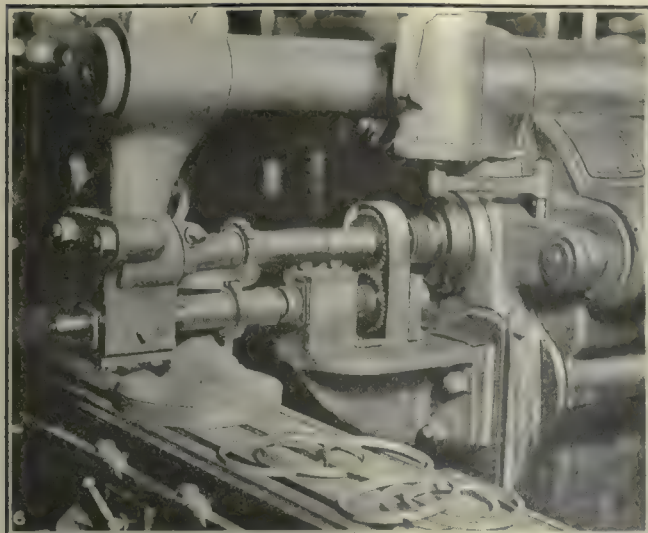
CUTTING LAP JOINT IN PISTON RING
